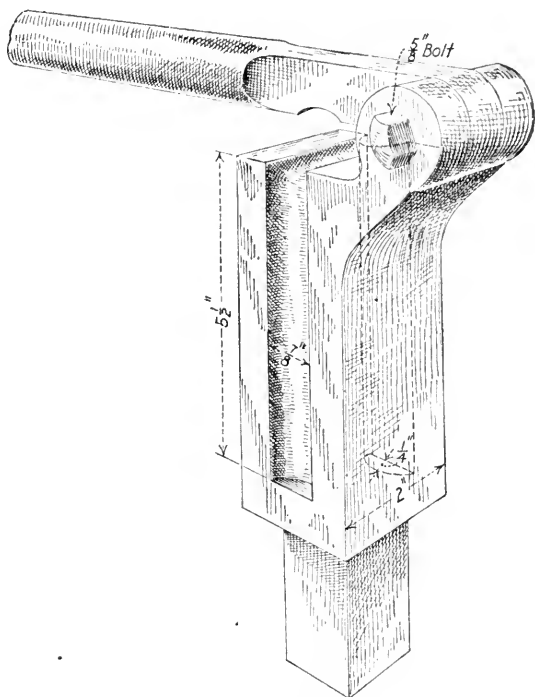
DEVICE FOR SHAPING MACHINE-DRILL U-BOLTS.
